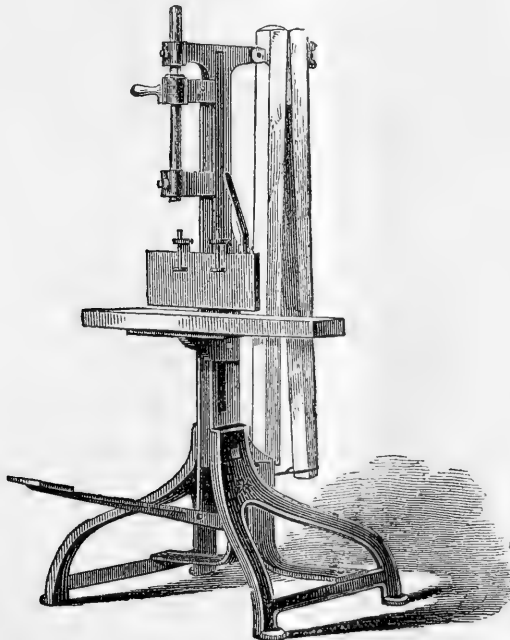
PORTABLE FOOT MORTISING MACHINE.
